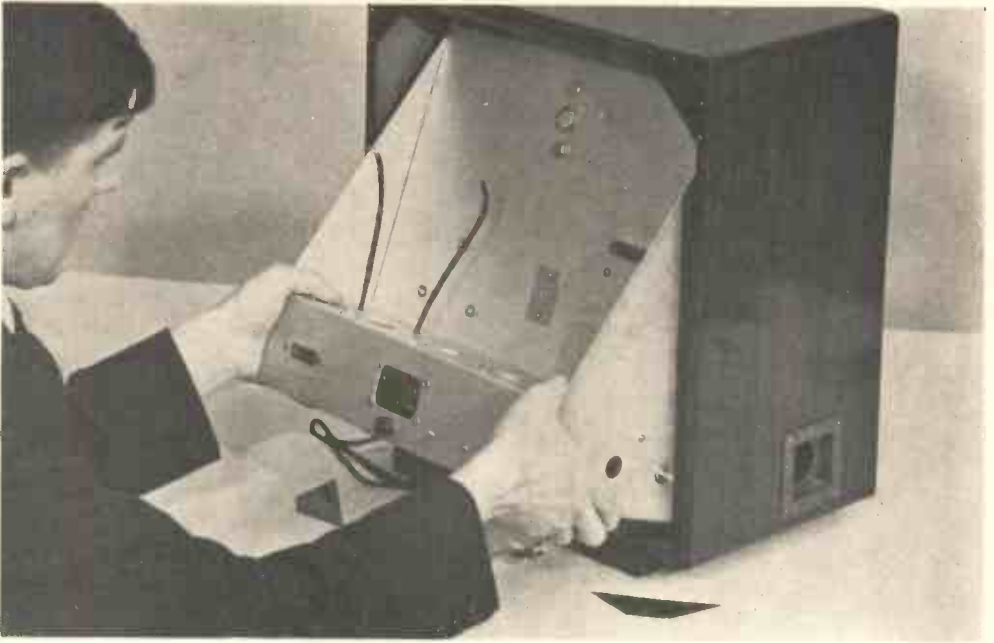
TILTING THE CHASSIS DURING REMOVAL.
